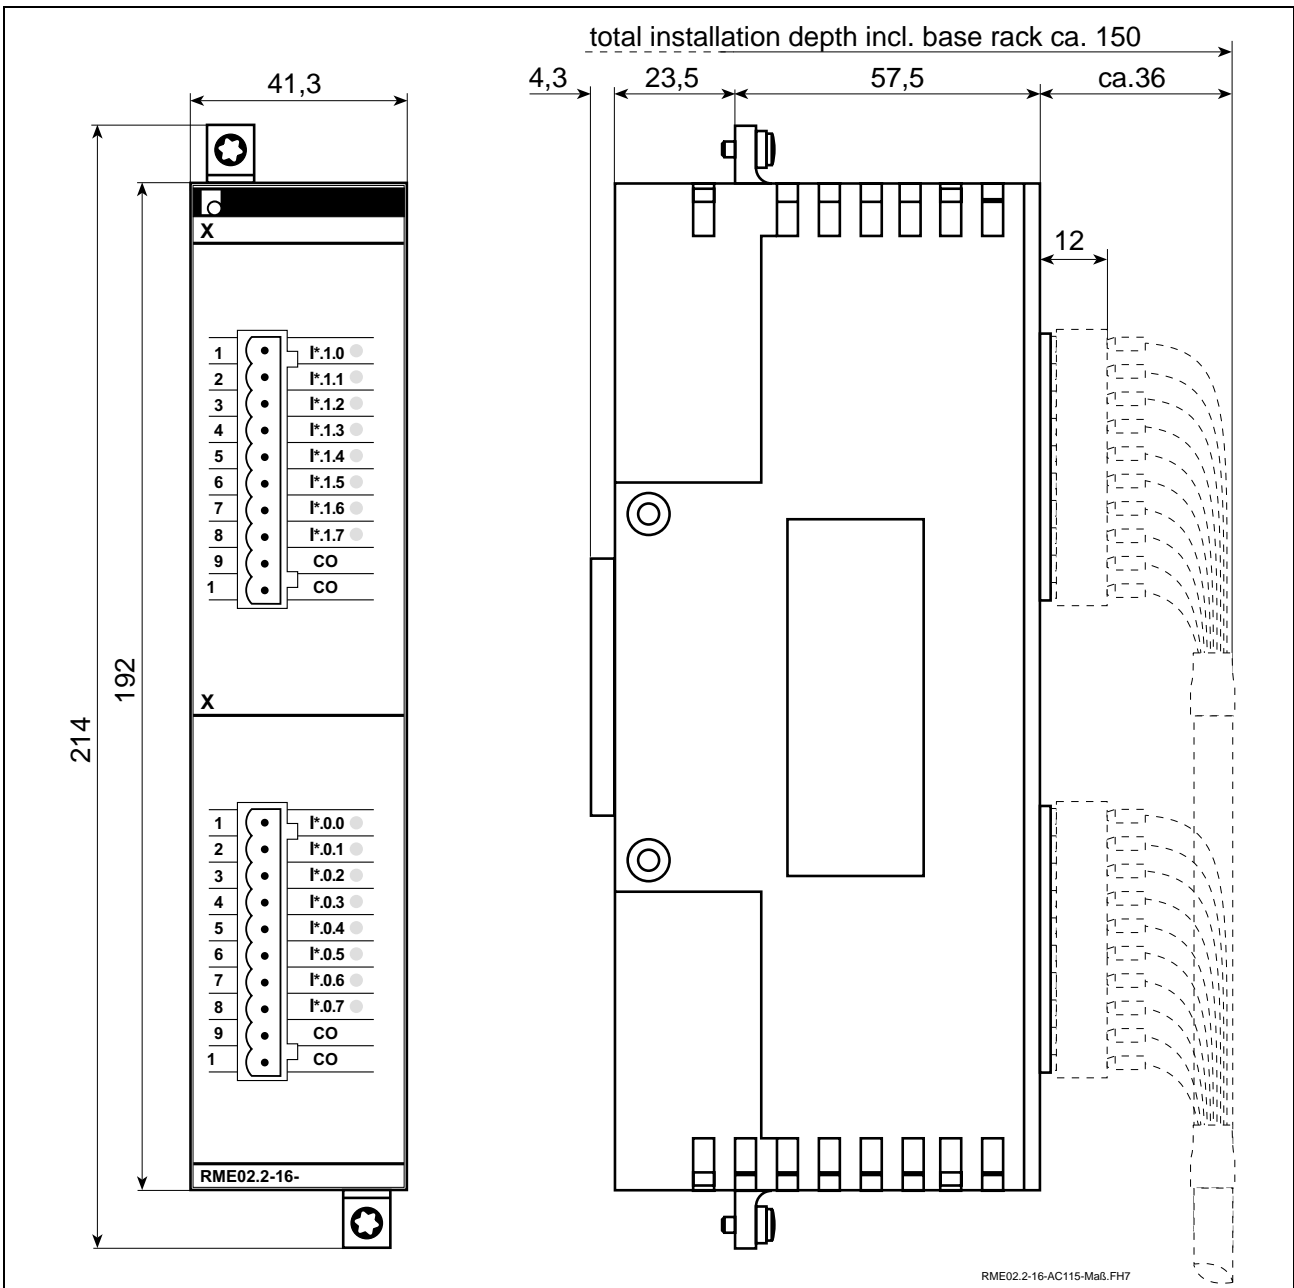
Mounting dimensions RME02.2-16-AC115
